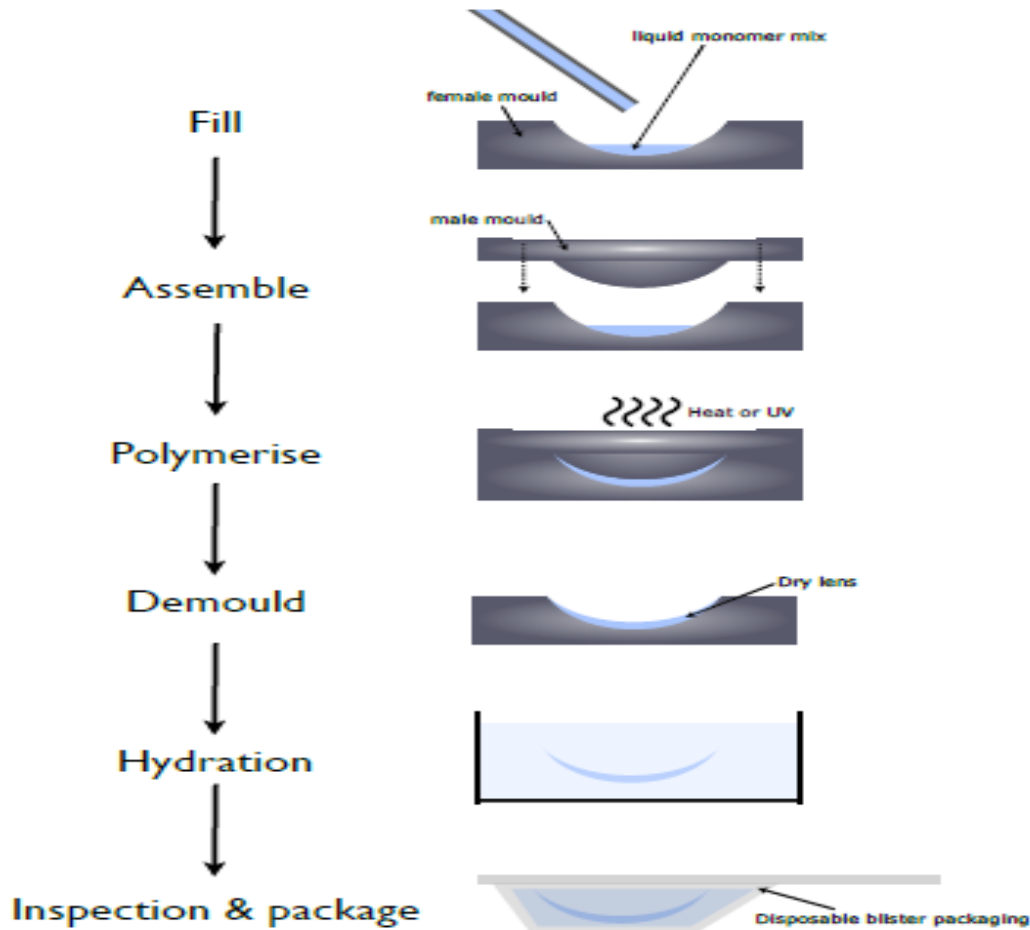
A schematic diagram of manufacture of contact lenses by a cast moulding process [17]
